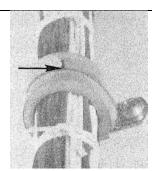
Examples of clamps that are properly and improperly installed on wire bundles.
